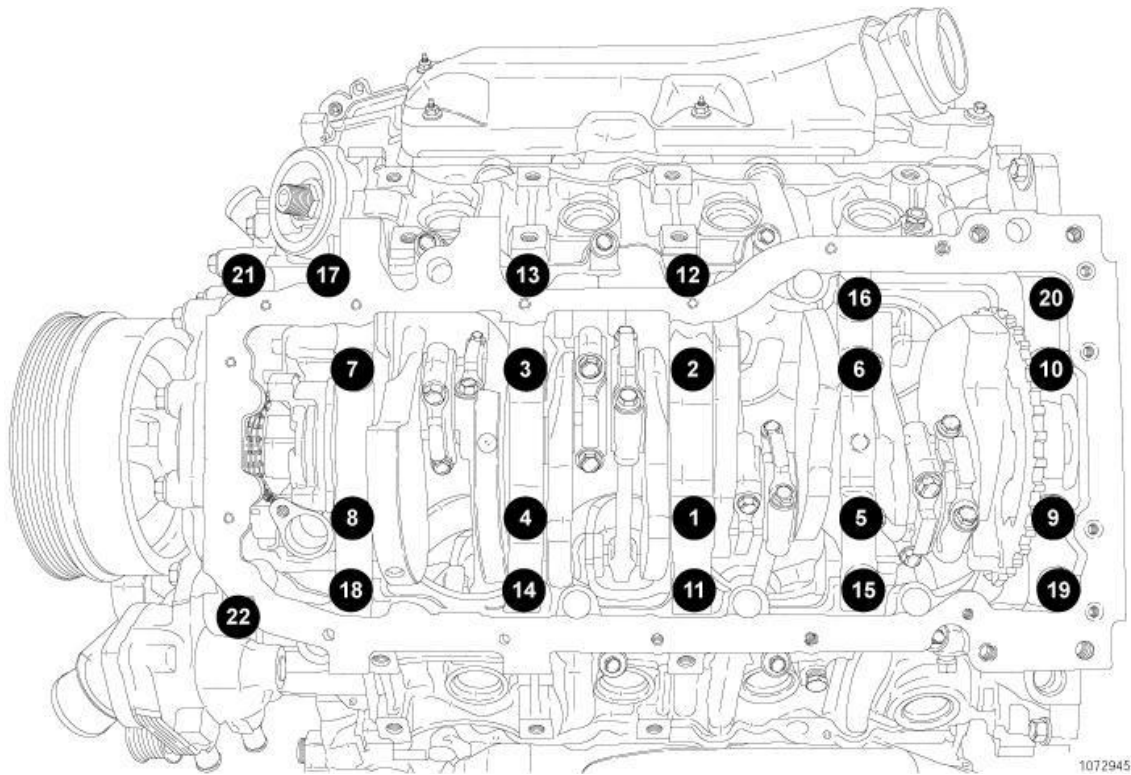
Tightening Bedplate Bolts (1 Of 4)
